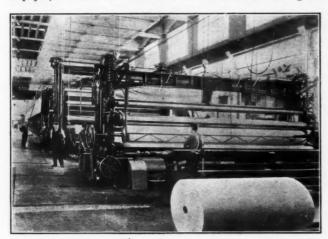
Roll Winder and Slitter, Cameron Machine Company, Brooklyn, N. Y.
